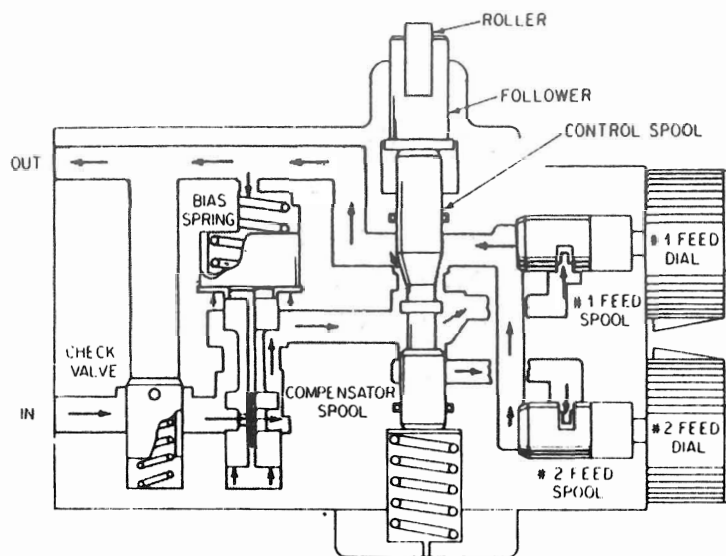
Compensating-type two-way valve regulating flow to a three way diversion valve and adjustable orifice assembly
